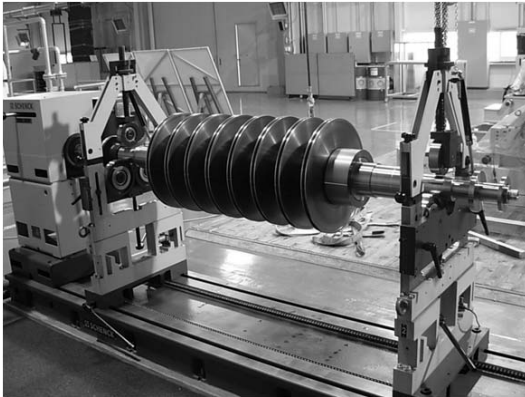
Low-speed balancing set-up for the rotor (Balancing machine maker : Nagahama Schenck)
